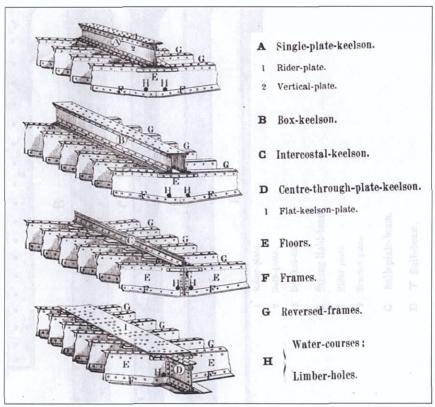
Illustration showing frame construction present in SS16B (after Paasch 1890 Plate 38)
